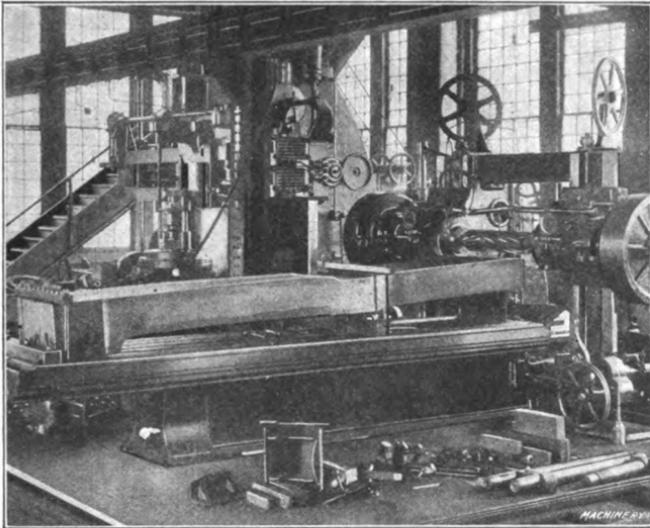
Stack of Traller Frames blocked up for Milling Taper End
